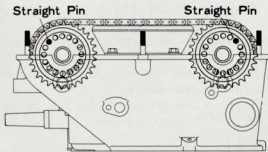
Camshaft Timing Y5200 Gears & Straight Pins
